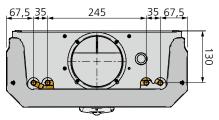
Dimensions ADRIATIC VAV Prisma, end view water connection
